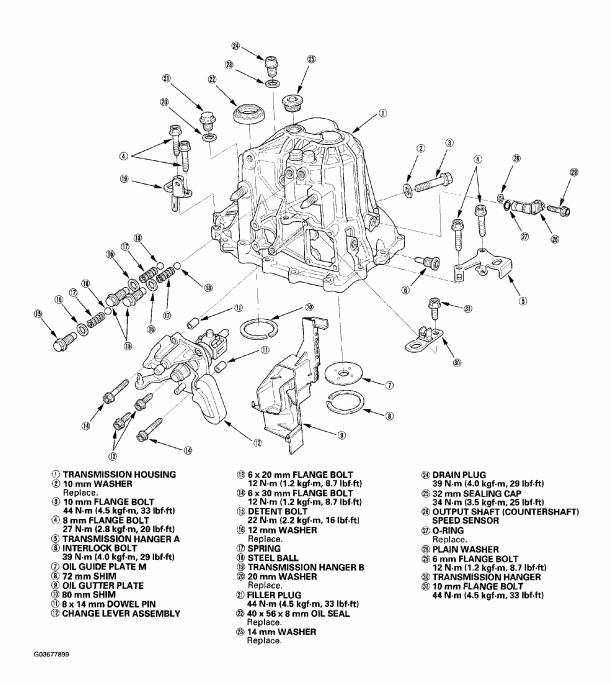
Exploded View - Transmission Housing Courtesy of AMERICAN HONDA MOTOR CO., INC.
